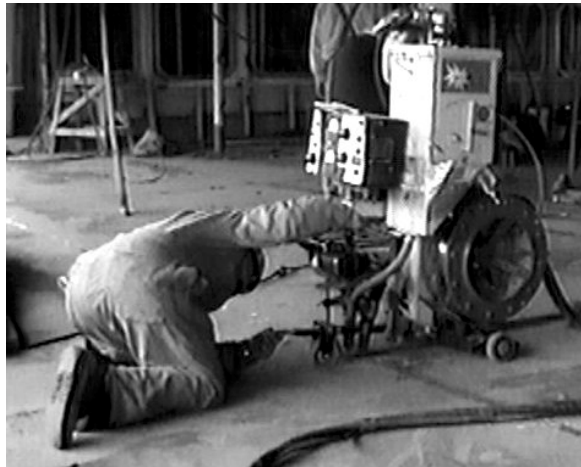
Worker setting up semi-automatic wire-feed welder
